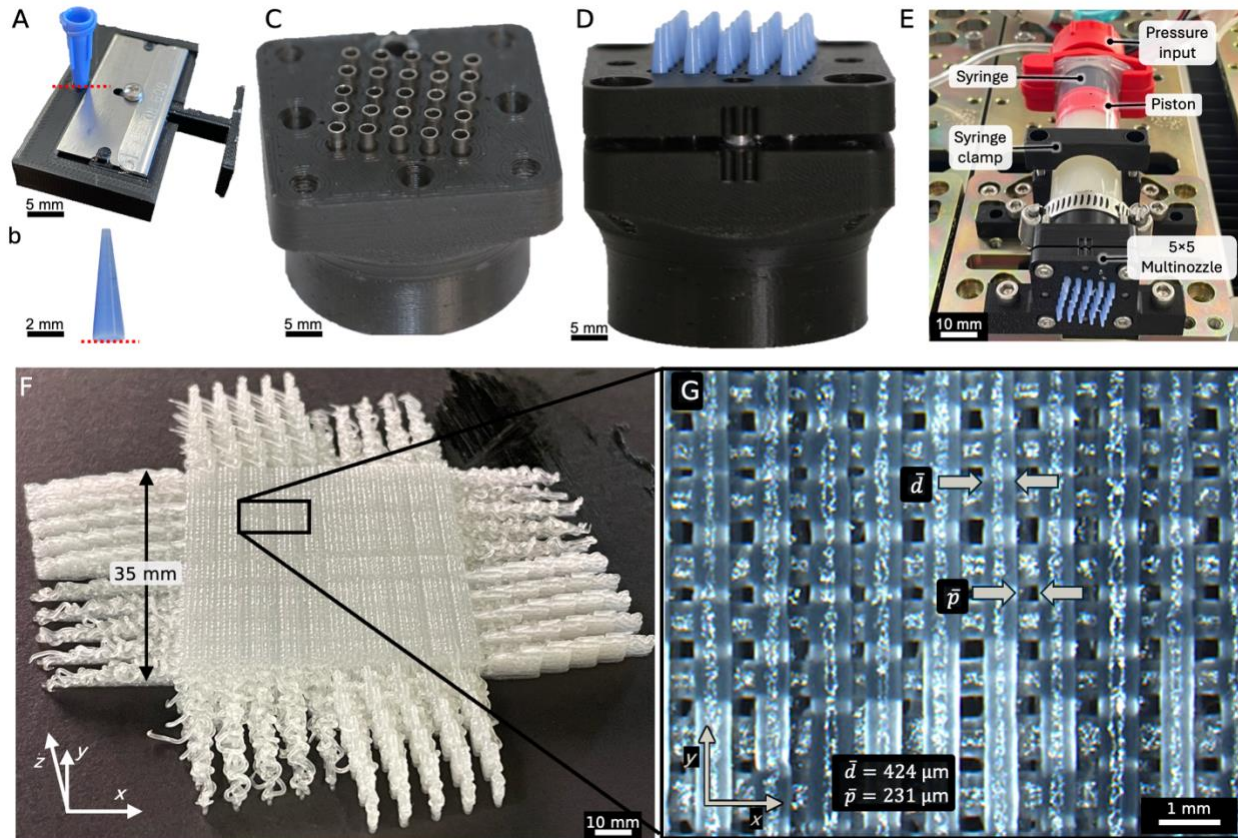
Preliminary multinozzle prototype based on commercial tapered dispensing tips. a) Custom trimming jig composed of a two-part FFF-printed body and a sliding razor-blade carriage, used to position and cut tapered tips. b) Representative trimmed commercial tapered tip. c) Compact manifold with stainless-steel tube inserts bonded into the body to provide leak-tight seats for the truncated tips. d) Assembled 5×5 prototype ($N = 25$) illustrating the packing density achievable with shortened tips. e) Benchtop extrusion setup mounted on the Aerotech system, including syringe, piston, pressure inlet, clamp, and installed multinozzle. f) Organic ink micro scaffold printed with 2 passes per layer of 5×5 multinozzle. g) Enlarged view of the printed structure, showing an average filament diameter $\bar{d} = 424 \mu\text{m}$ and average pore size $\bar{p} = 231 \mu\text{m}$.
